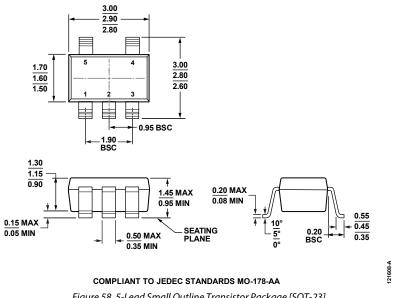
5-Lead Small Outline Transistor Package [SOT-23] (RJ-5) Dimensions shown in millimeters
